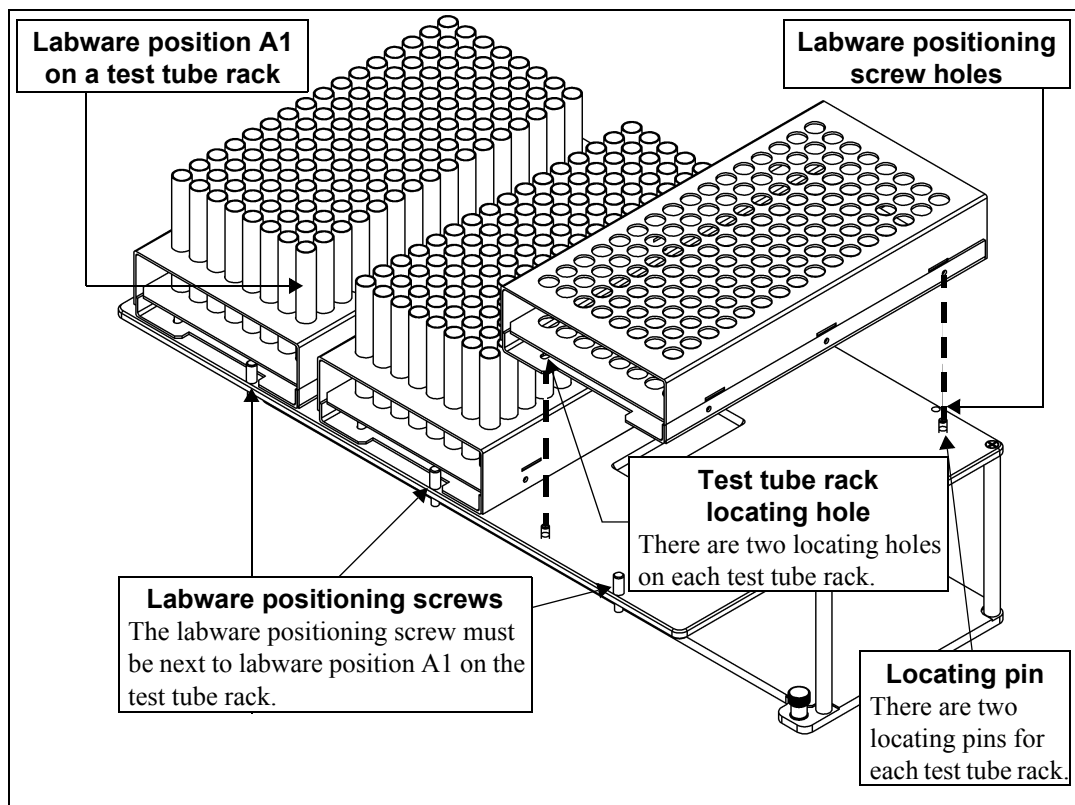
Mounting tube racks to a 1 x 3 Test Tube Rack ALP (Left facing)
